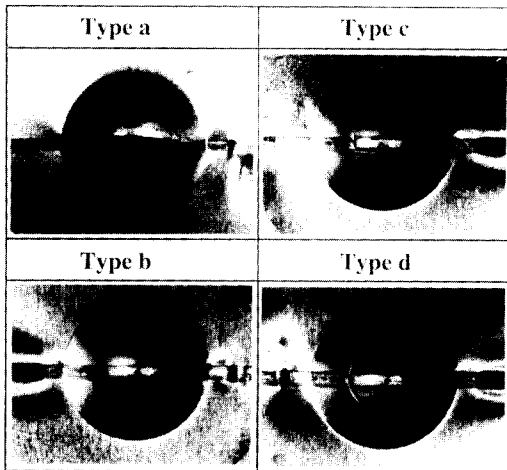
Classification of fracture types based on fracture appearance after modified Erichsen test
